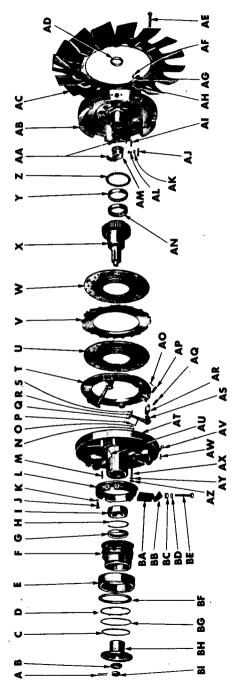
Clutch, Flywheel, and Fan Disassembled
